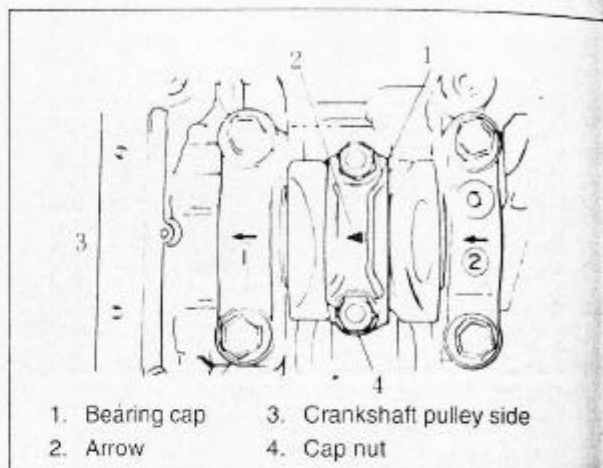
A — 90 INSTALLATION OF BEARING CAP
